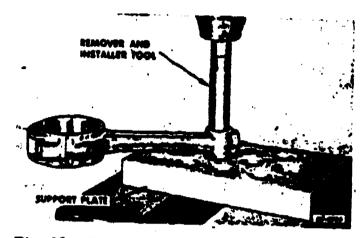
Removing Piston Pin Bushing With SE-1036-4 Remover and Installer Tool
